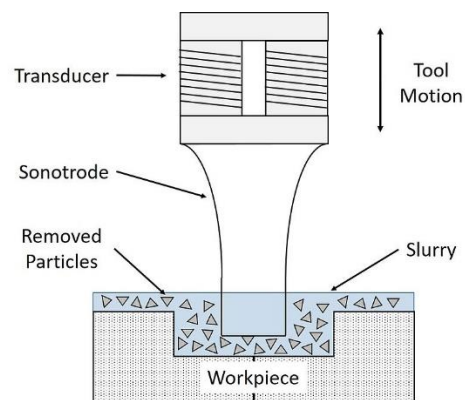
Illustration of an ultrasonic machining tool and how it interacts with the workpiece.
